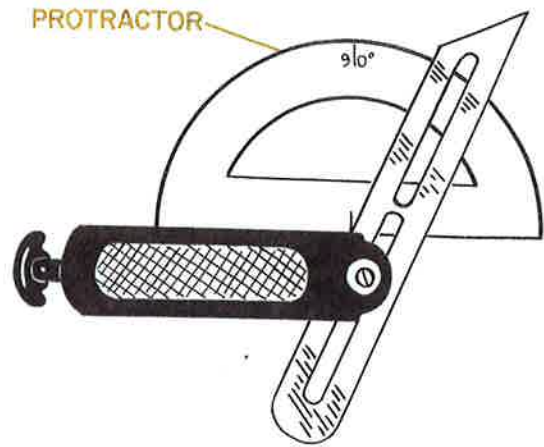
Adjusting the bevel to the desired angle against a protractor.
